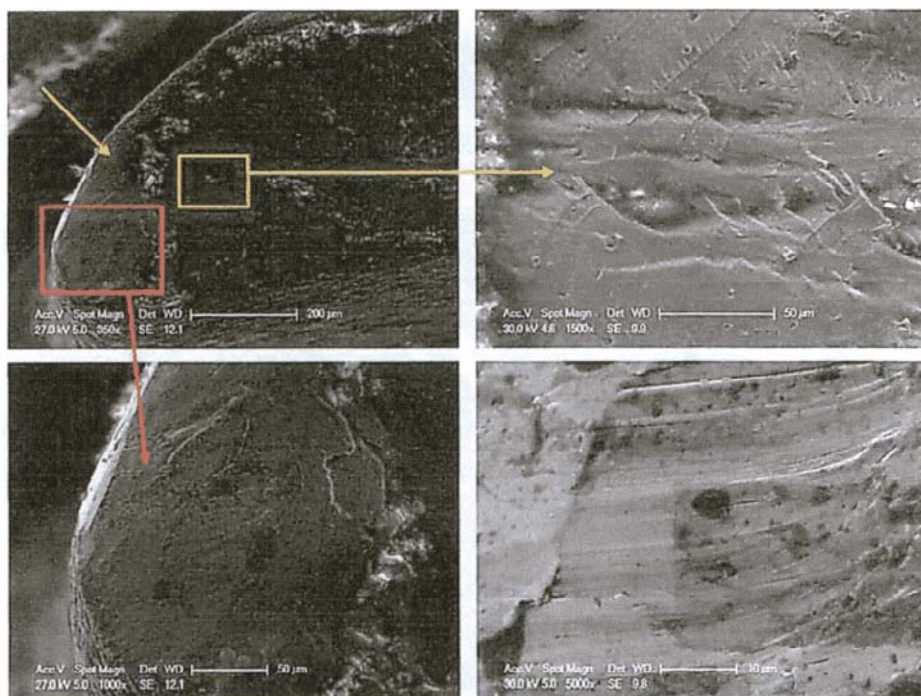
SEM micrographs of the fracture surface of specimen N° 2 showing fatigue striations.
